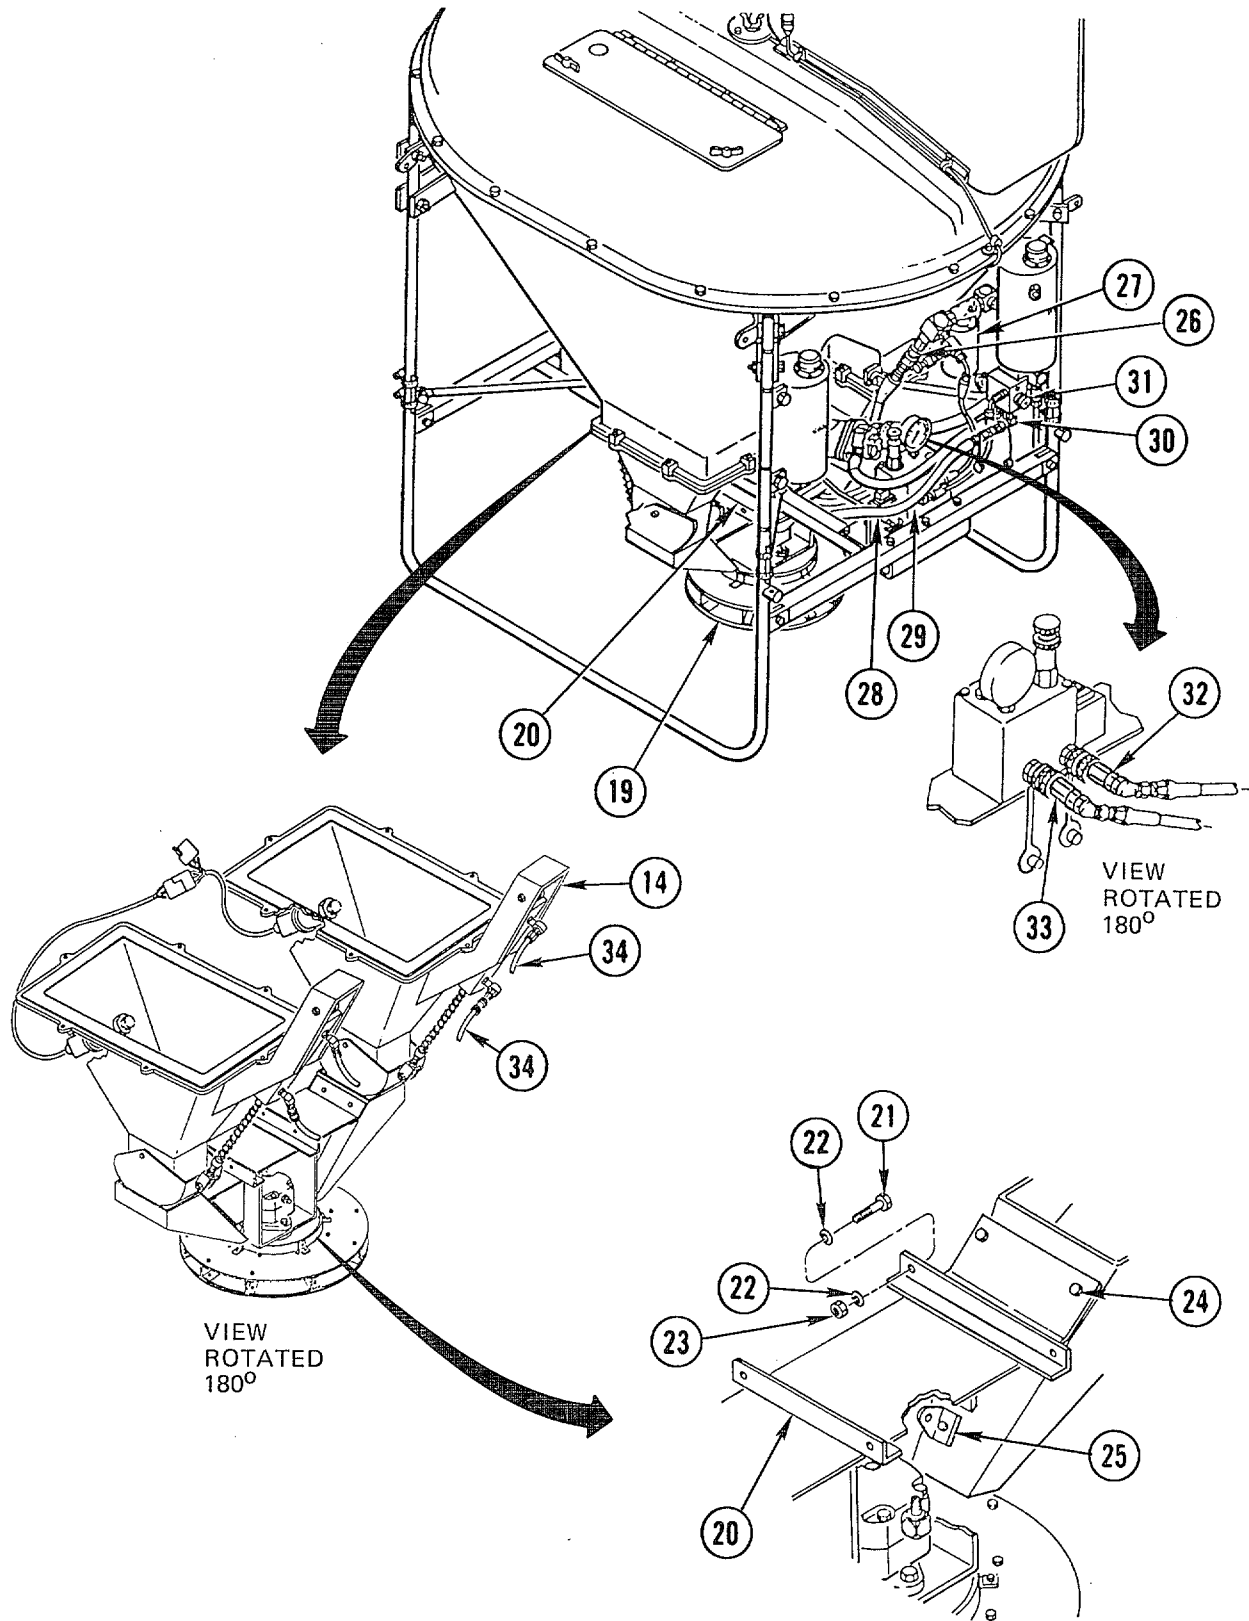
Assembly of SD System (Sheet 2 of 2)
